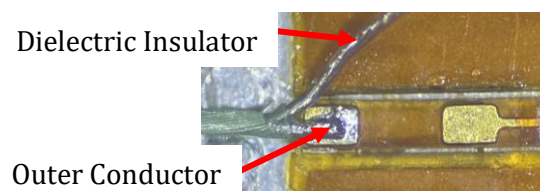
Soldered outer conductor to ground pad of transducer subassembly
